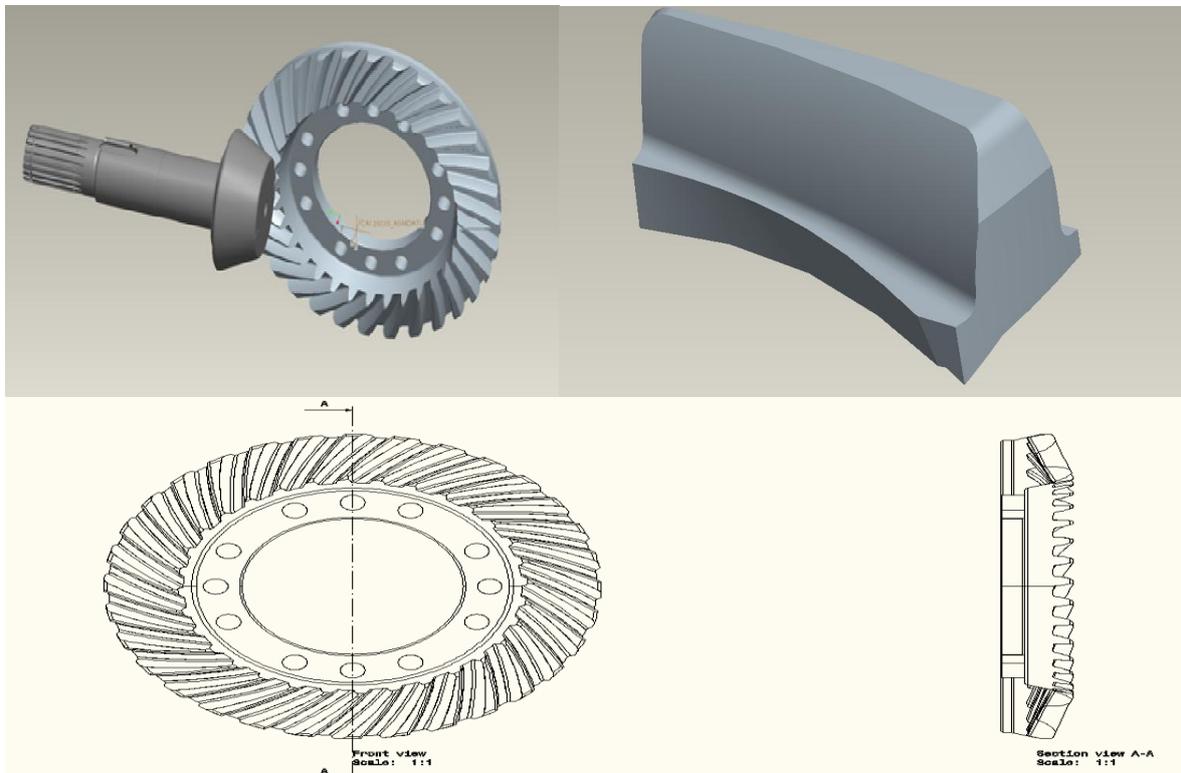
3-D model of assembly and tooth 2-D view of Crown gear
